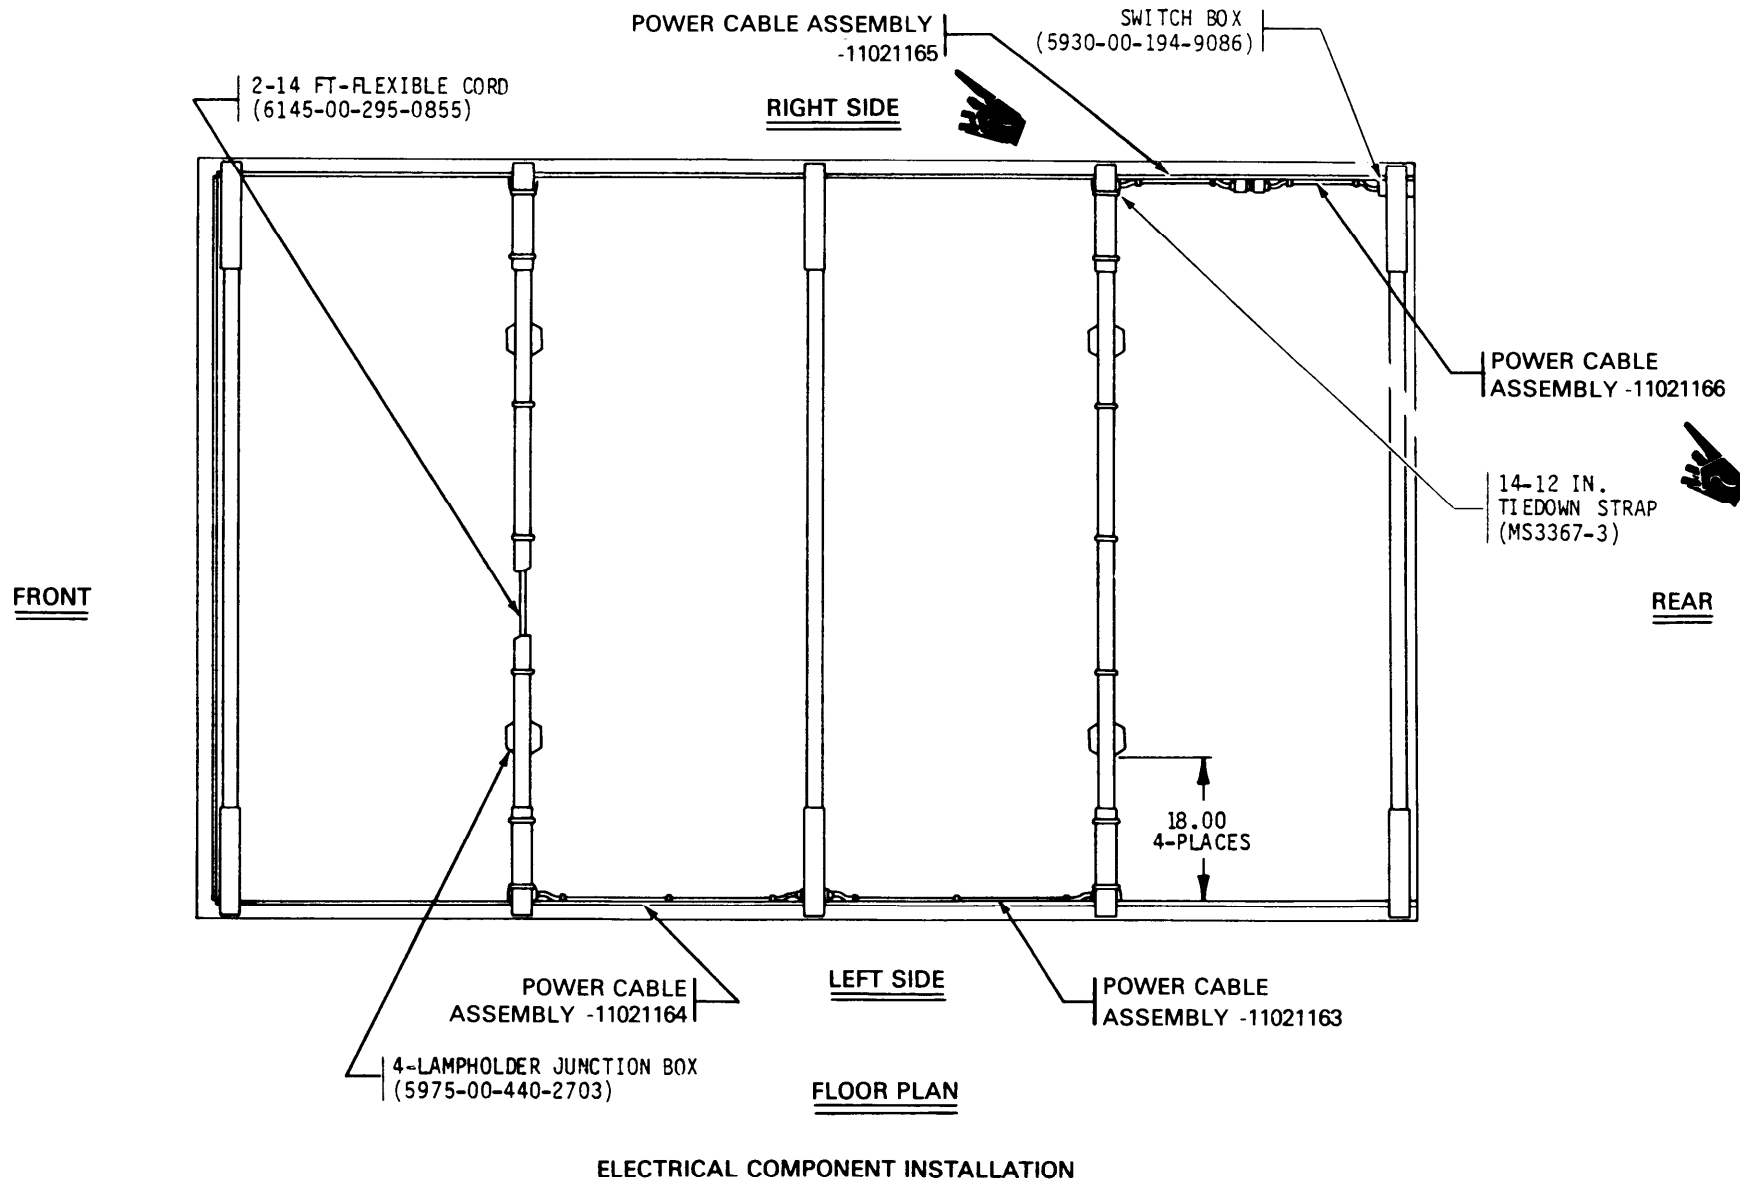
Electrical Components to be Mounted, Unit 1, M35A2, Floor Plan.
